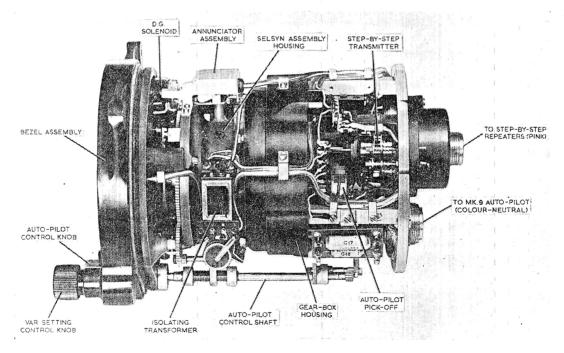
Master indicator, Type A, G.-M. compass, Mk. 4B, view showing variation setting mechanism
